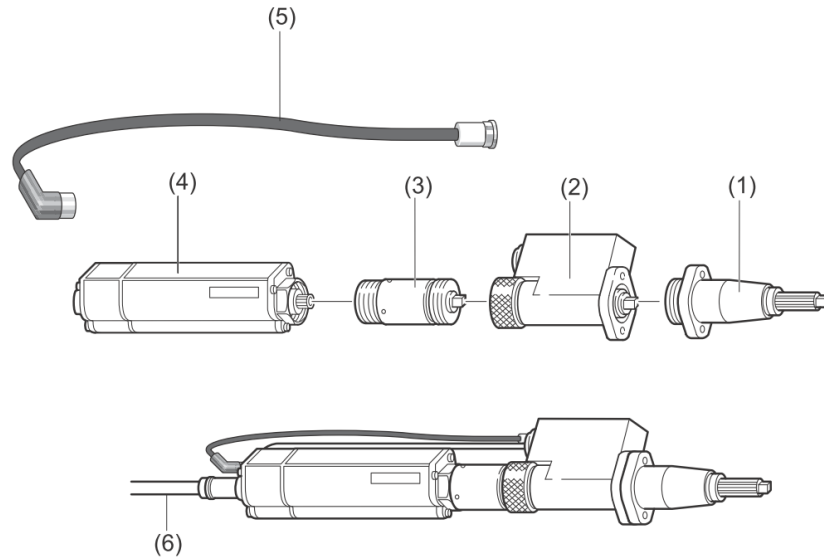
Hardware components of the modular tightening spindle: Output drive (1), measurement transducer (2), planetary gearbox (3), EC drive unit servomotor (4), measurement transducer cable (5) and connecting cable to control system (6) [4].
